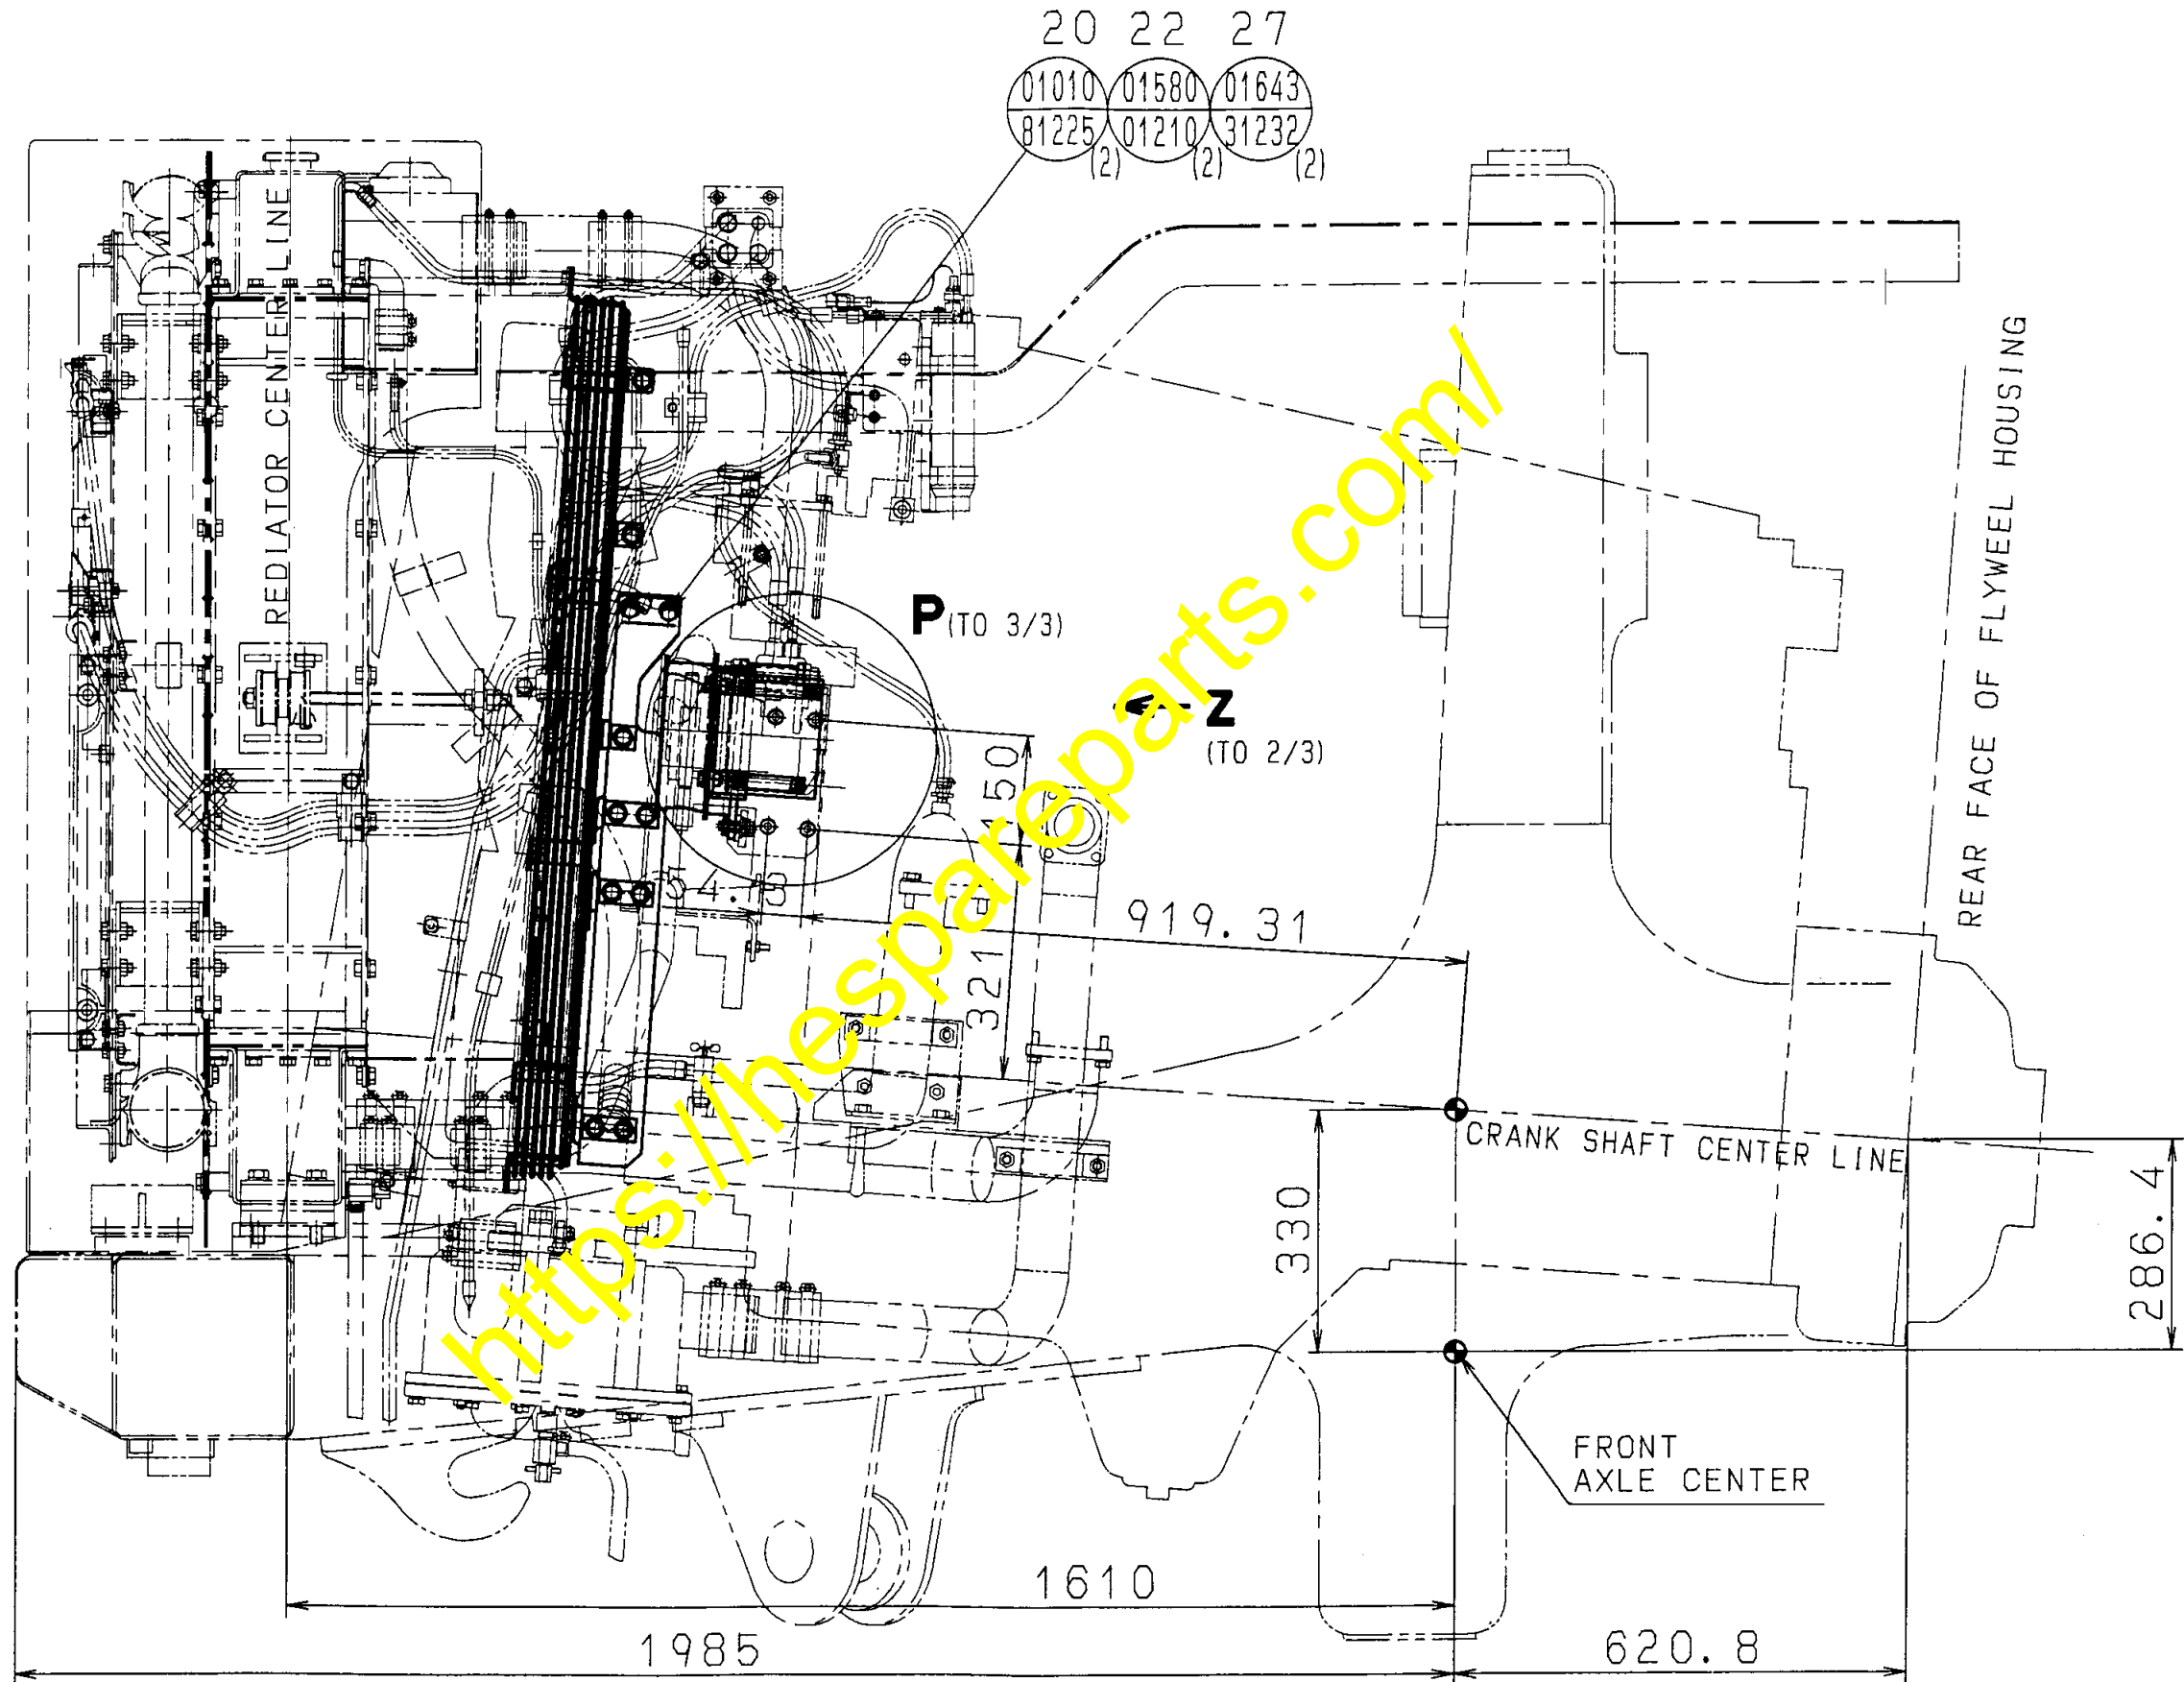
Installing the fan belt cover and the air conditioner compressor cover (1/3)
